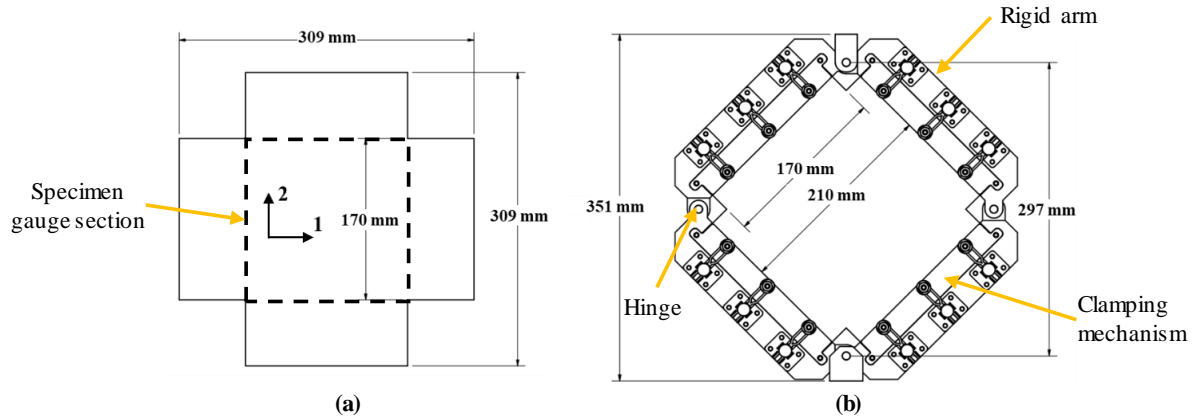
(a) PFT specimen geometry, and (b) testing fixture dimensions.
